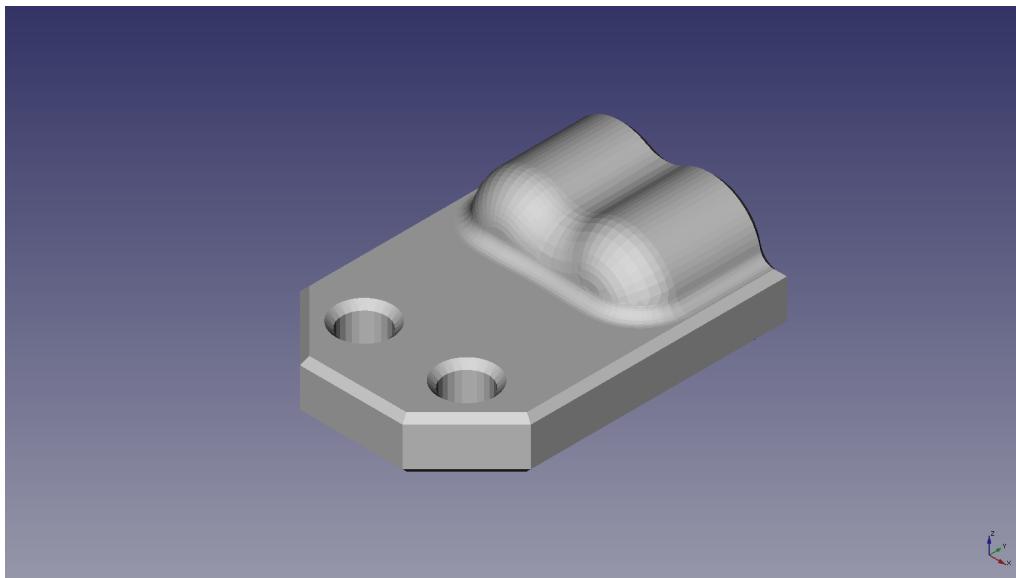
Begonia 3D Printed Cable Carrier Mount Render
